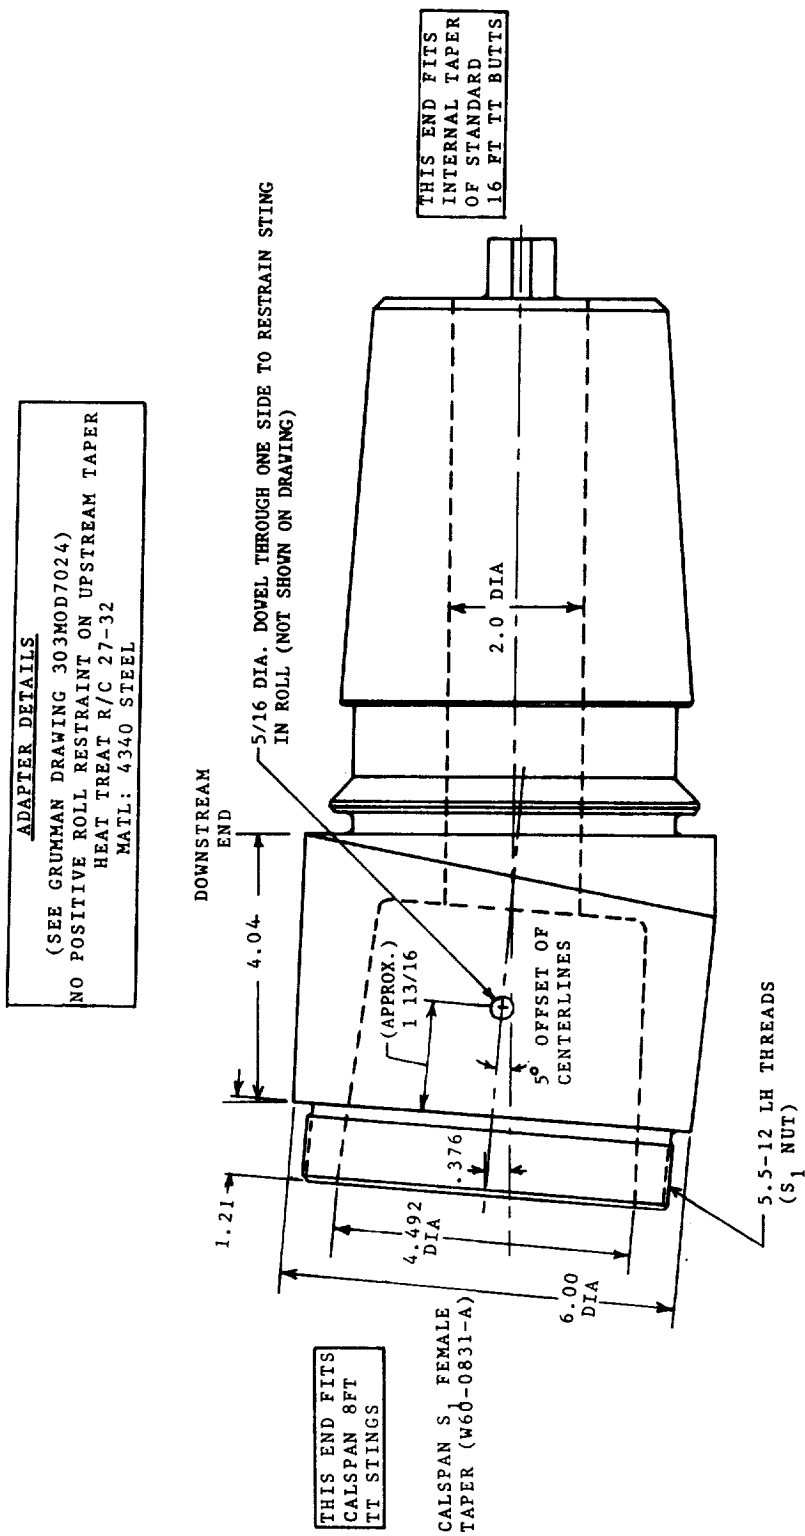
Sketch of adapter 303MOD7024. (All dimensions are in inches unless otherwise indicated.)
